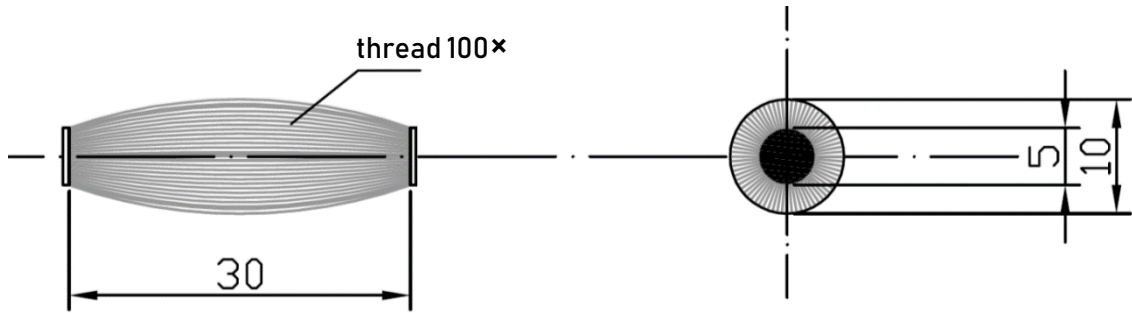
Technical drawing of the linear arrangement of support thread. Dimensions in mm.
